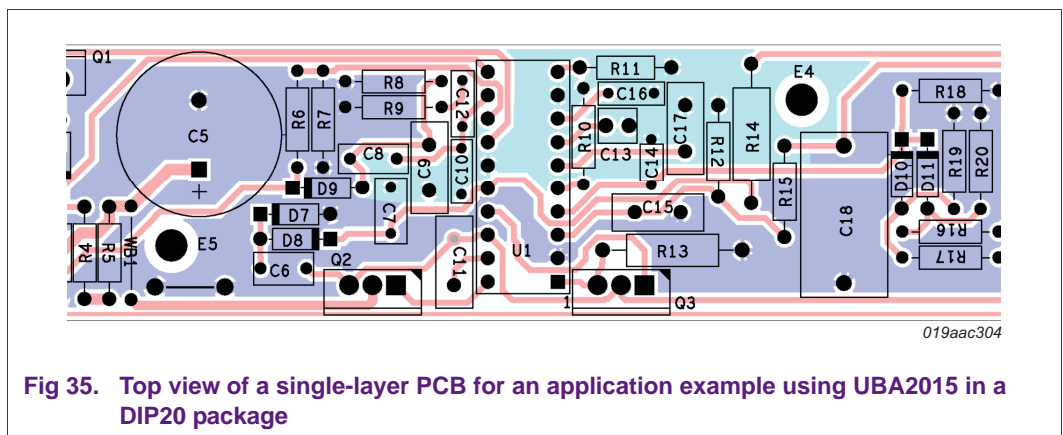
Top view of a single-layer PCB for an application example using UBA2015 in a DIP20 package
